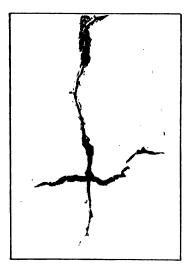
Crack in threaded hole of boiler-plate fire-box.
